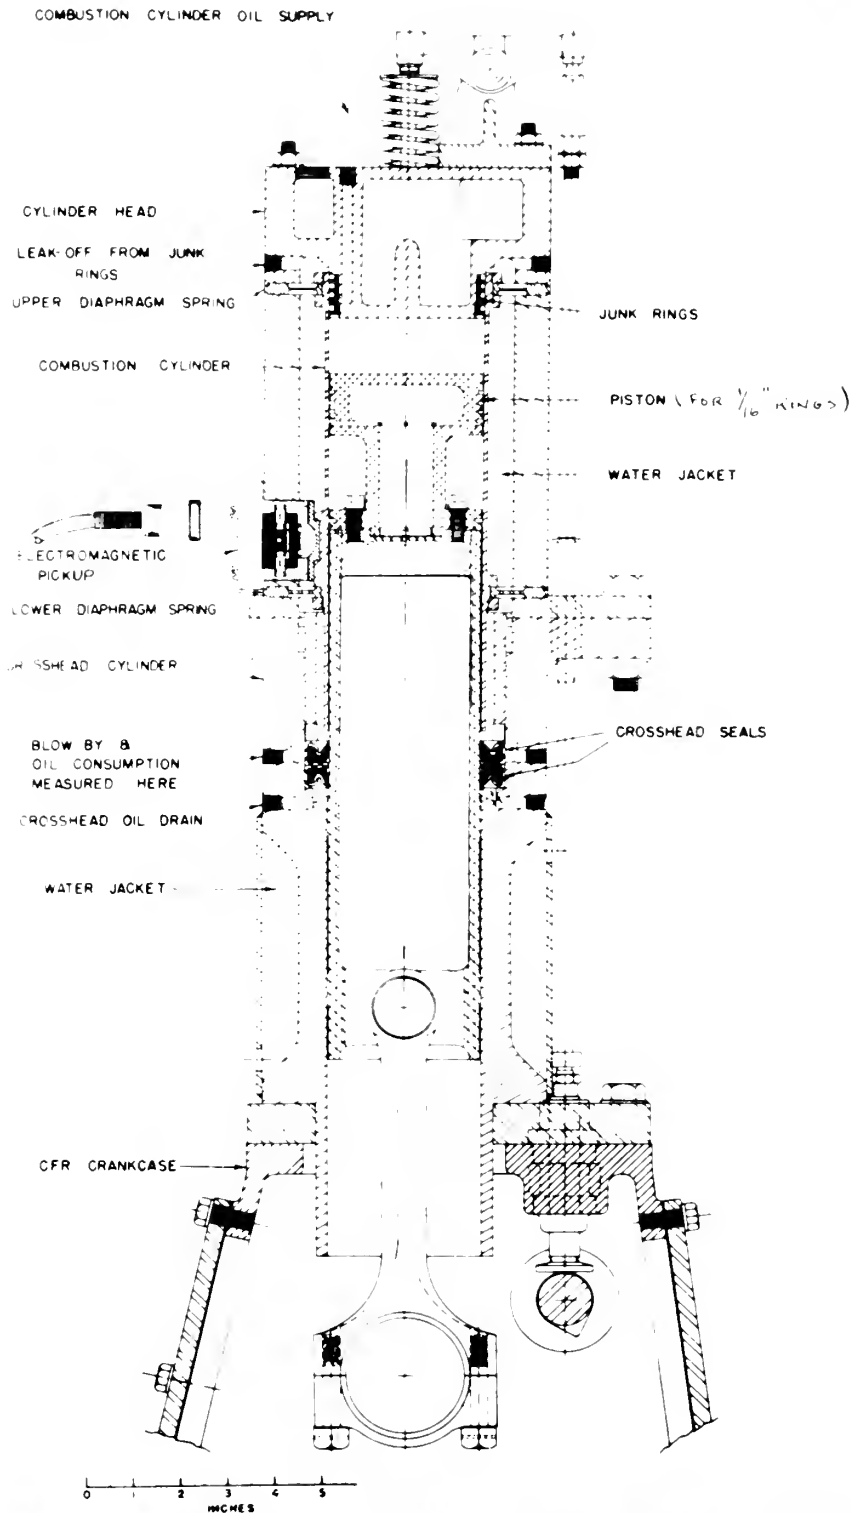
Figure I- Engine, showing crosshead and spring-mounted combustion cylinder. PISTON FOR $\frac{1}{16}$ " RINGS. (FROM NACA TN 2117 BY PERMISSION)
